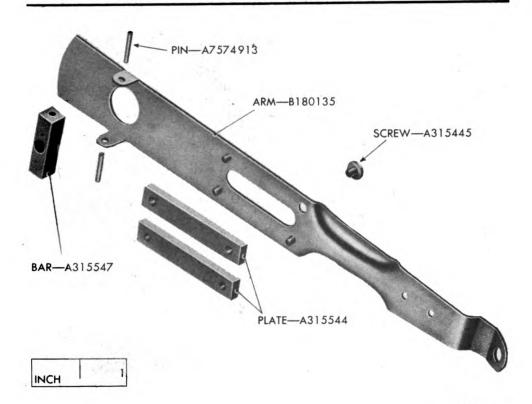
Recording Arm Assembly and Indicator Dial Index Exploded From Indicator Dial Housing Assembly C82353
